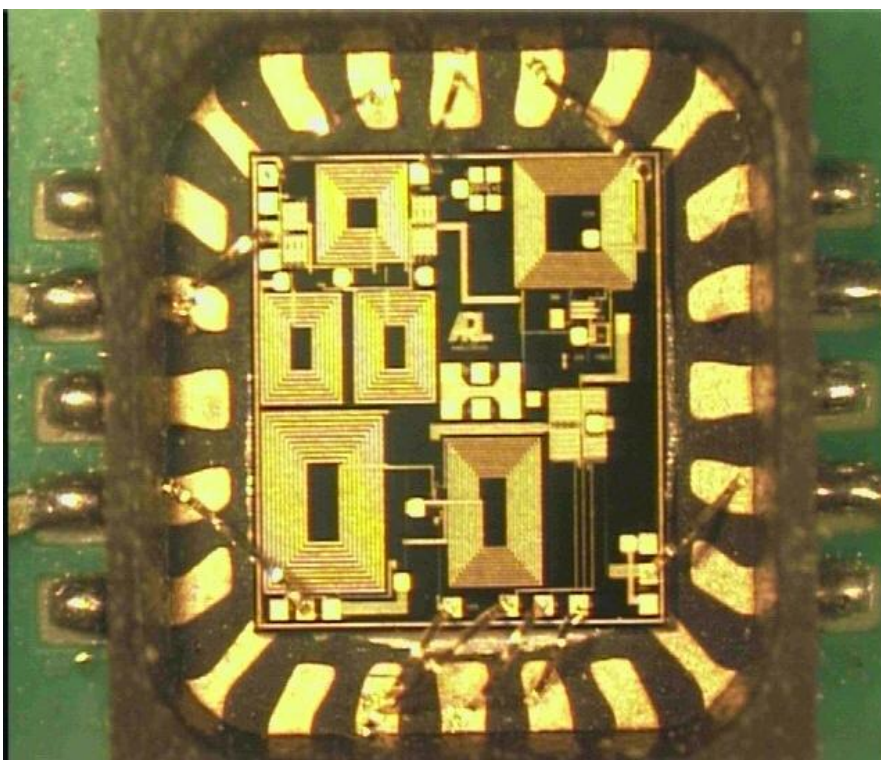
ARL23M425 assembled in a 4x4mm QFN package.
